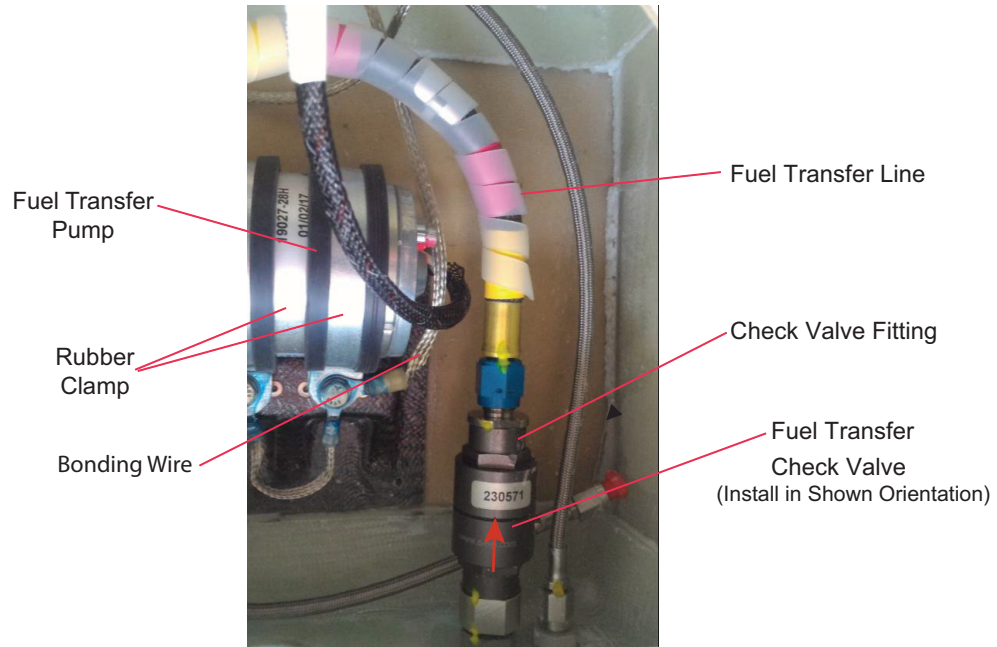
Fuel Transfer Check-Valve - Removal/Installation
